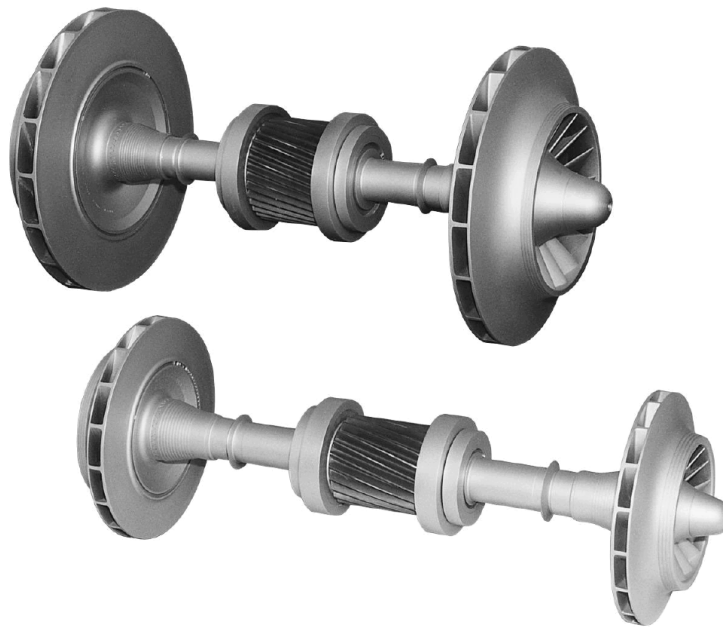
Typical Pinion Rotors from an Integrally Geared Compressor
